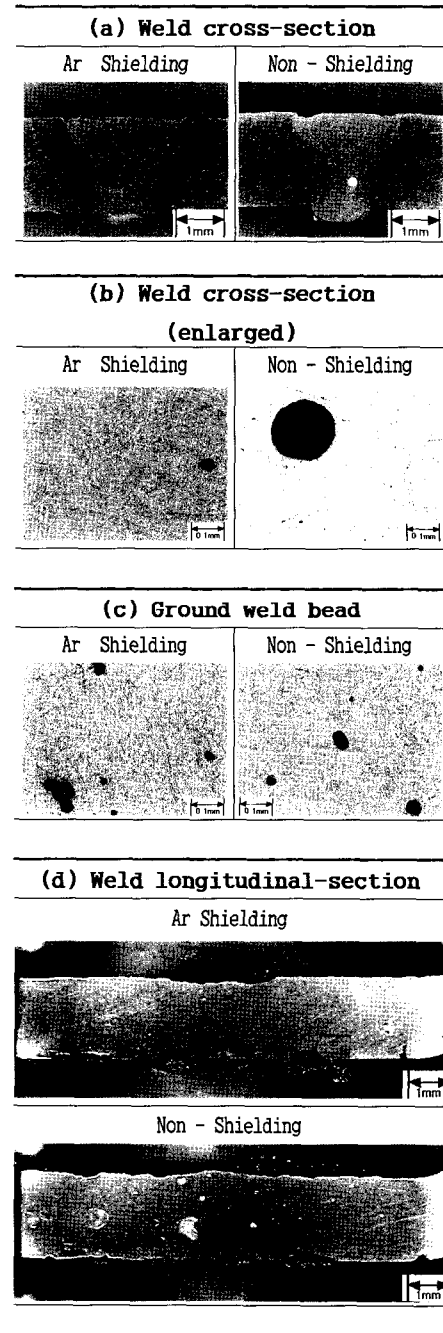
Polished, etched weld sections and beads of 5052 aluminum alloy laser welds.
